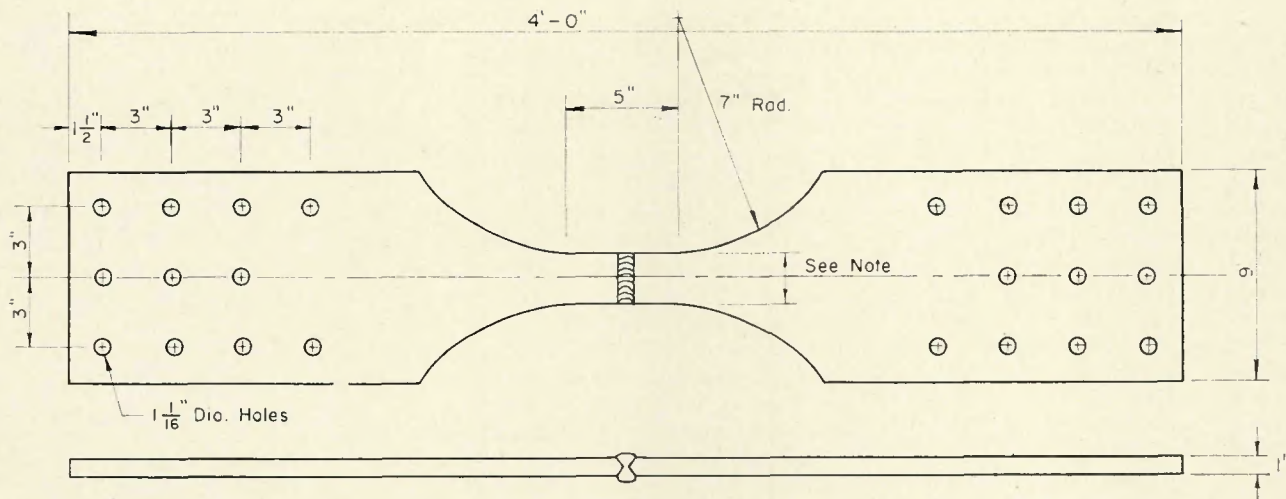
Details of the butt welded fatigue test specimens. The weld reinforcement was removed prior to testing
